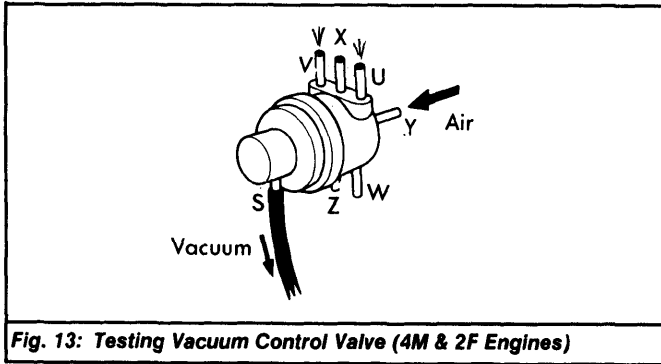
Testing Vacuum Control Valve (4M & 2F Engines)
